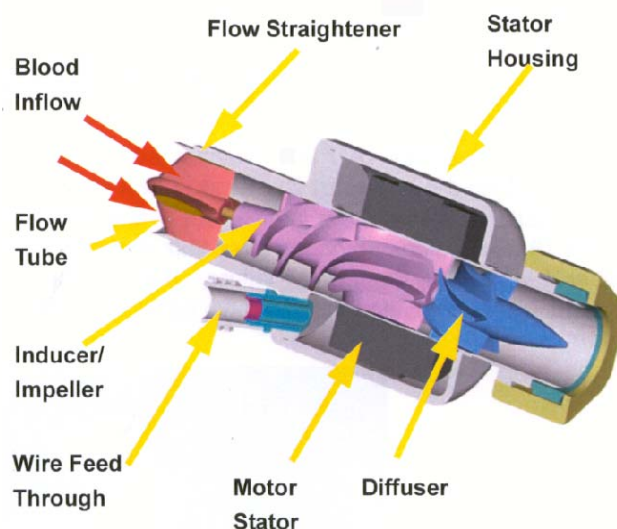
The MicroMed DeBaKey VAD® Child Pump Components.
